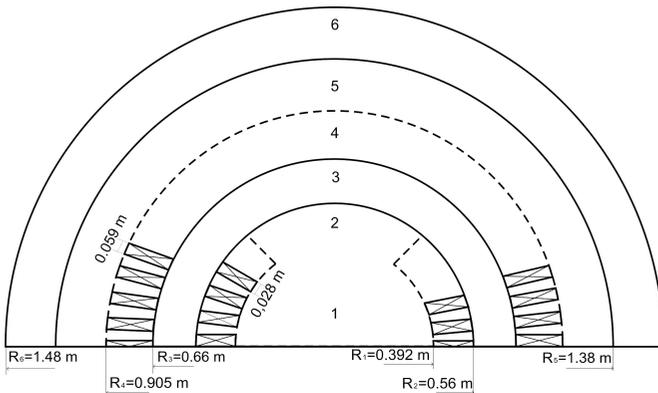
Main geometric zone dimensions of the turbogenerator cross section
